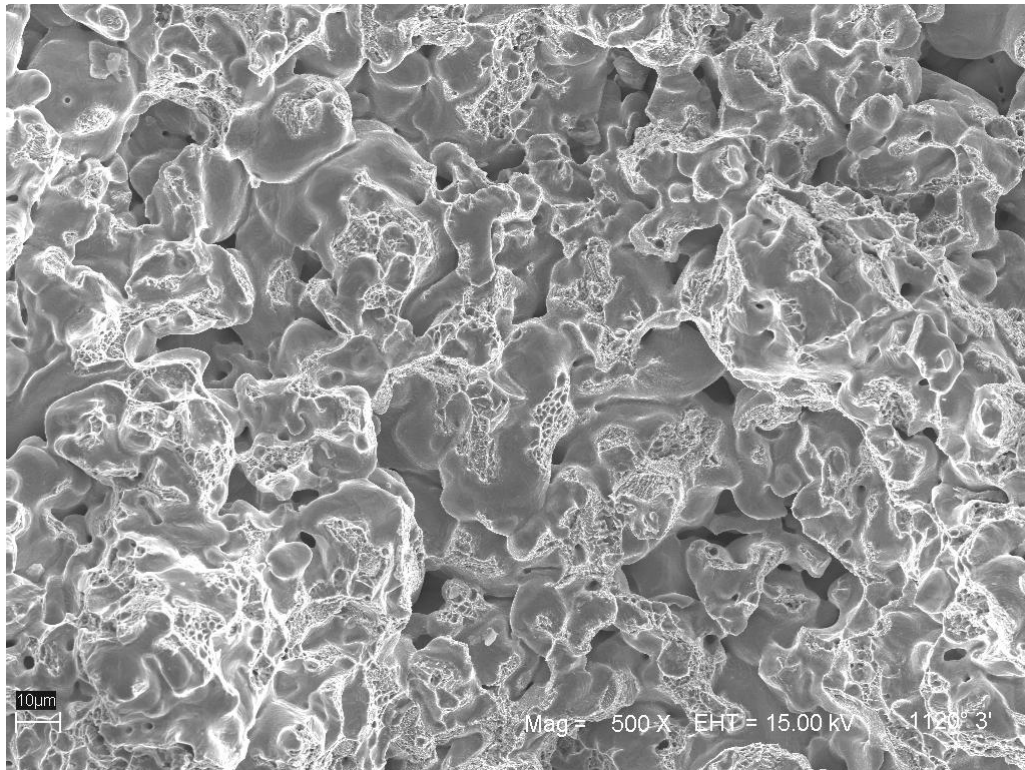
OVERVIEW OF THE FRACTURE SURFACE OF A1120-3 AT 500X.
